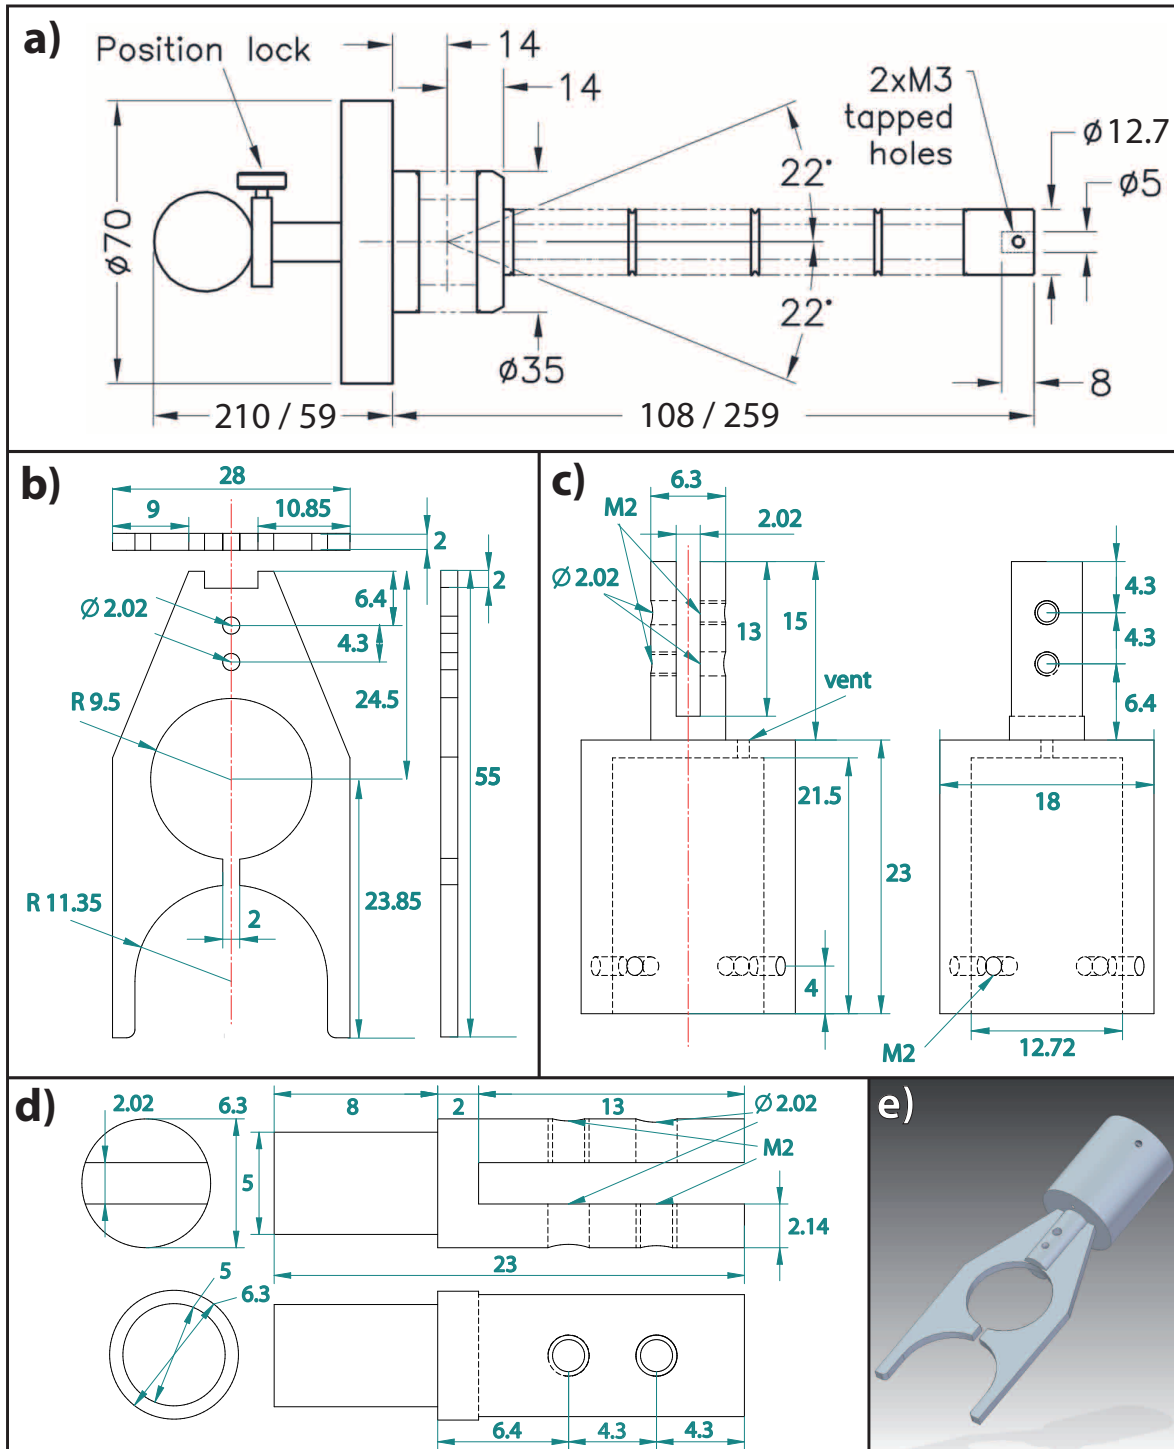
Construction of a transfer fork for a new wobble stick. a) Technical drawing of the ordered wobble stick. b) Technical Drawing of the transfer fork. c) Technical Drawing of the cylinder and the small rod that are used to attach the transfer fork to the wobble stick. d) Technical drawing of only the small rod. e) Image of all three parts put together.
